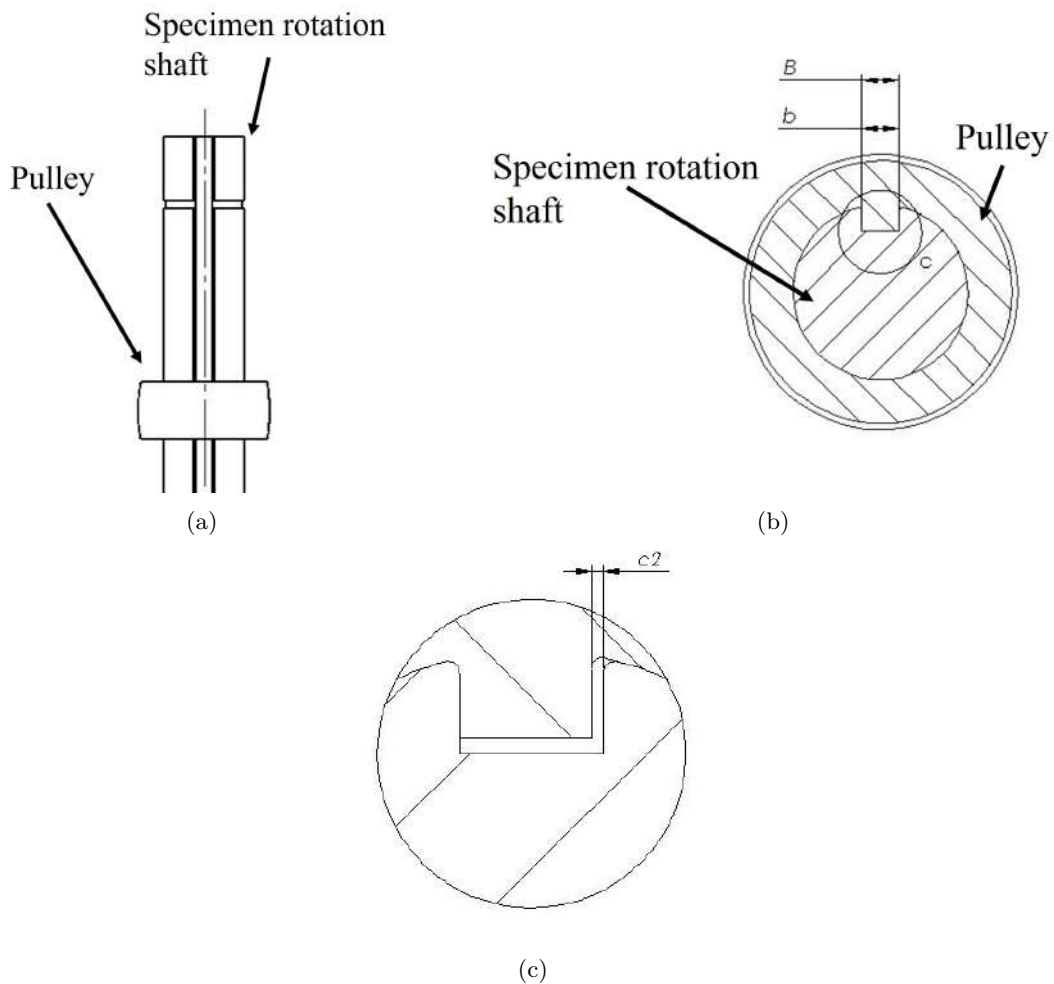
Assembly and clearance between specimen rotation shaft and pulley. (a) Section view of the shaft-pulley set. b belongs to the pulley, B belongs to the shaft. (b) Clearance between parts exaggerated for demonstration purposes.
